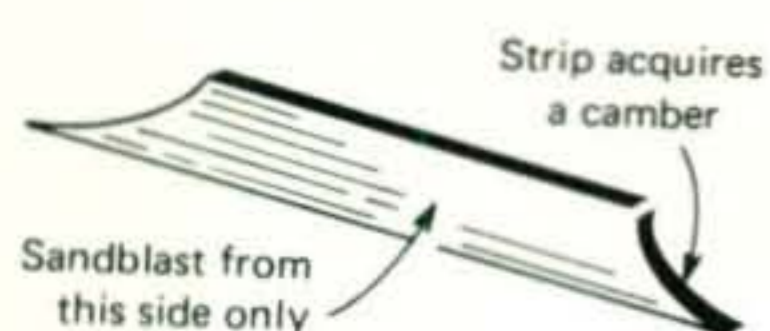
A bit of camber may be given to aluminum strips by sand blasting one side.
